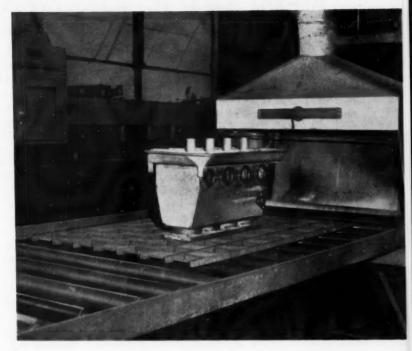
Castings and other stainless steel components are joined by a combination of welding and nickel-alloy brazing to produce this gas-turbine assembly.
